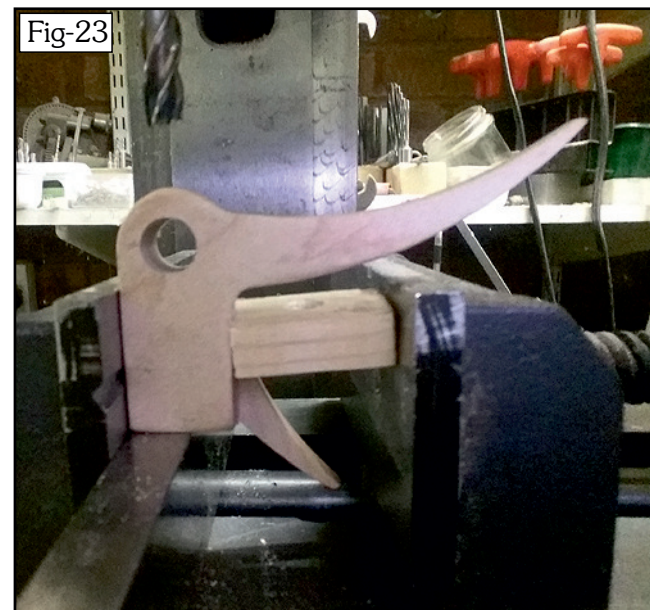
shows the Latch Lift/Finger assembly after having the bore enlarged to 8mm dia., turned 90° but keeping the left Vice Jaw as the datum, being clamped with a suitable scrap of timber, ready to have the 6mm wide recess for the Pivot Block machined into the top.
